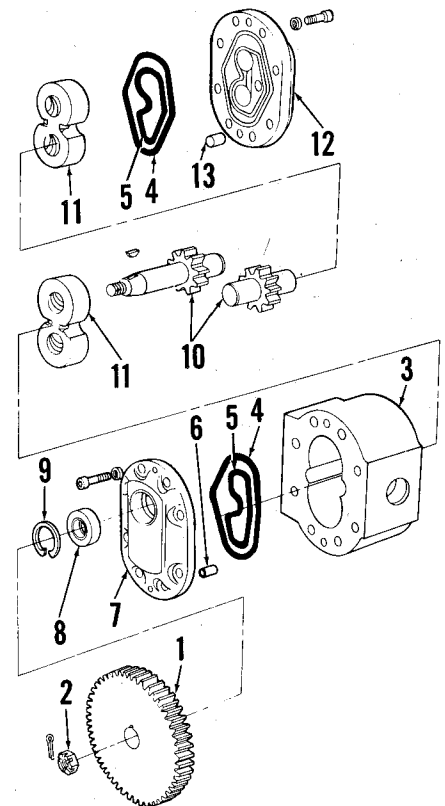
Exploded view of hydraulic pump assembly used on TW-10 and TW-20 models.
